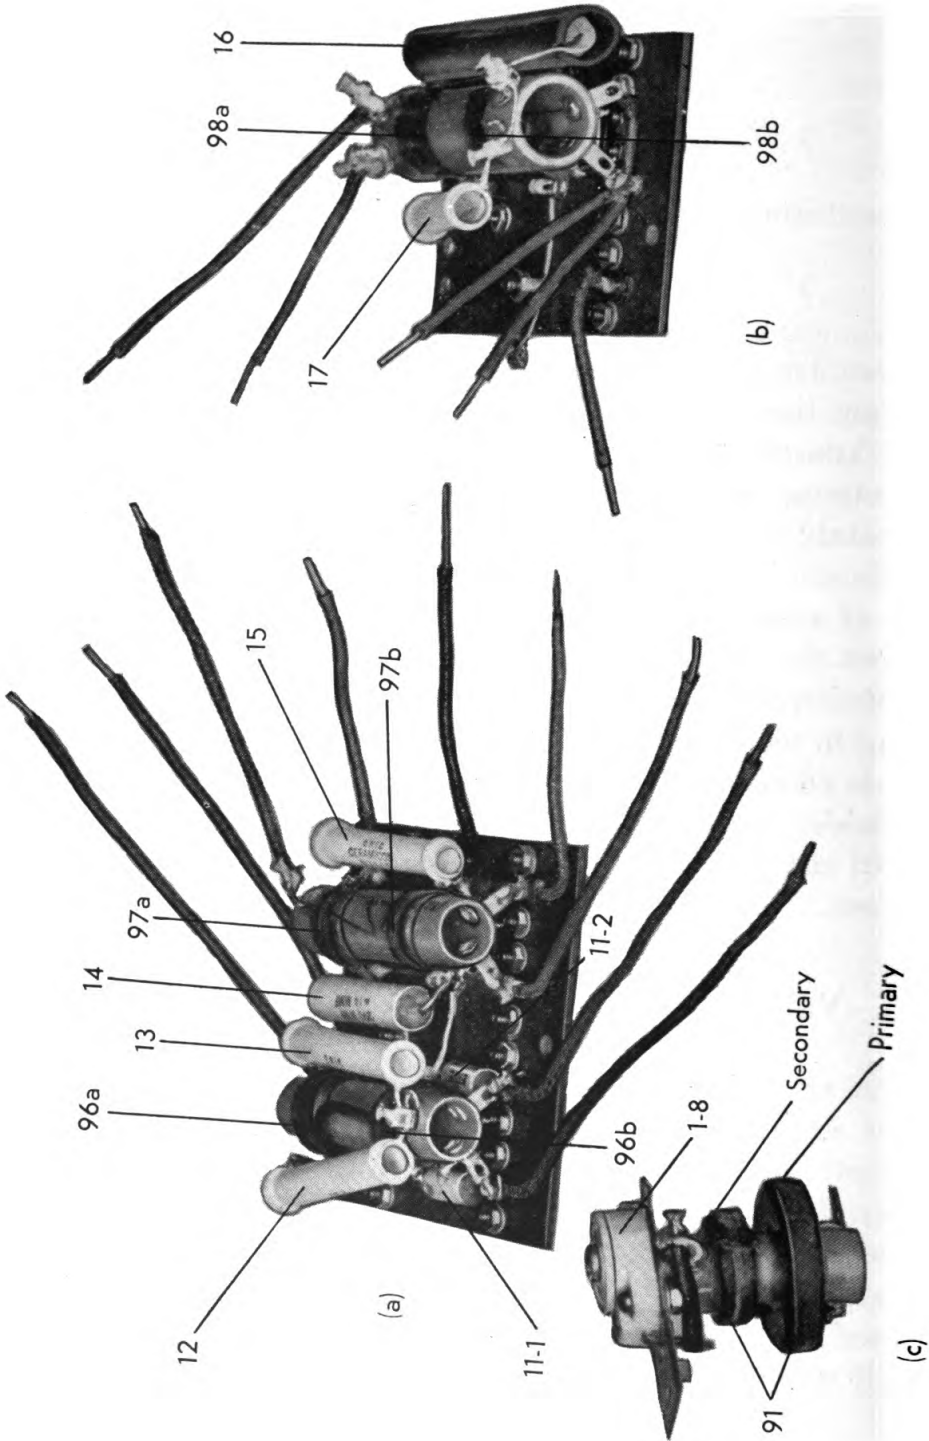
Radio Receiver BC-792-A, Oscillator Coil Sub-Assemblies, Typical R-F Coil Assembly
